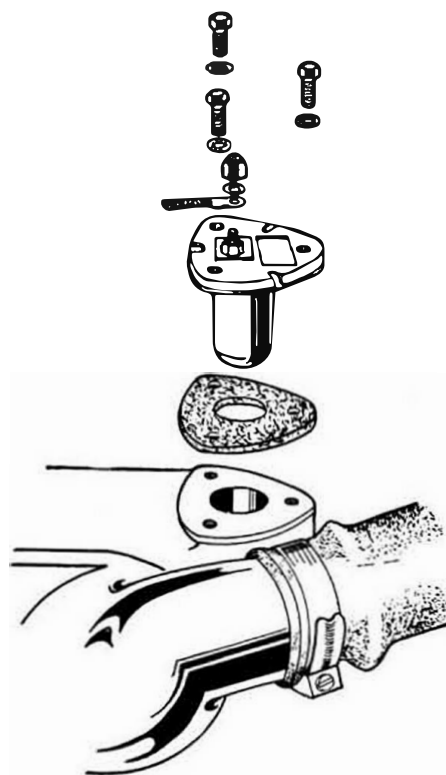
The auxiliary starting carburettor thermostatic switch
